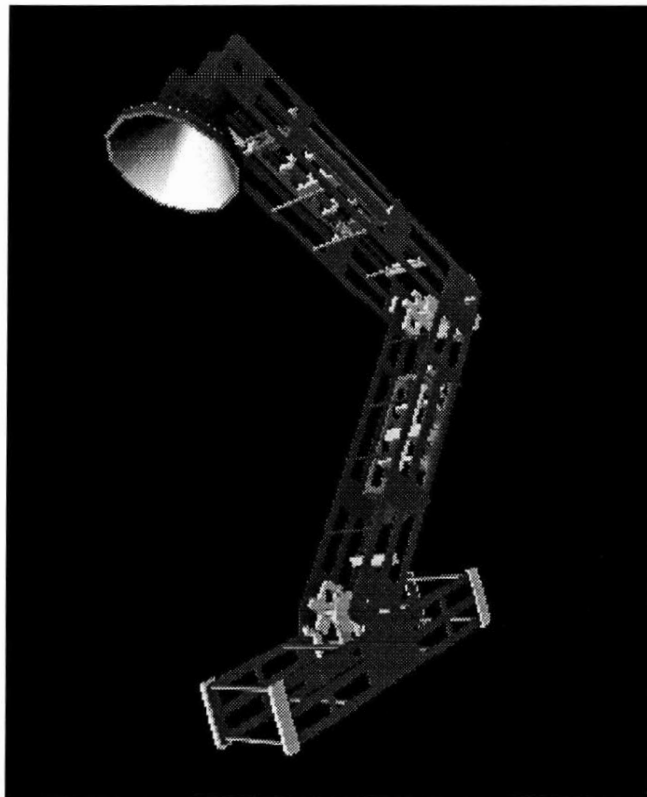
A PRO/Engineer assembly drawing of the lamp. The assembly incorporates all of the mechanical pieces of the lamp. The actuator assembly was modeled by Jerry Pratt.
